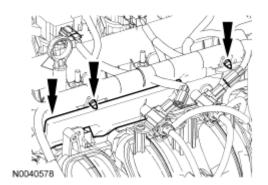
Locating Locking Ring And Brake Booster Vacuum Supply Tube Courtesy of FORD MOTOR CO.
